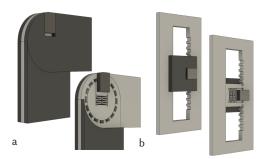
Revolute (a) and prismatic (b) mechanisms that can lock and unlock using a U-shaped latch.
